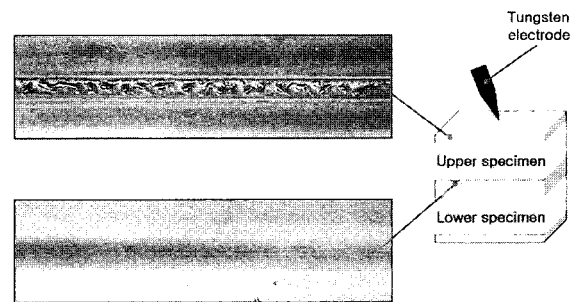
Bead shapes for autogenous TIG welding
